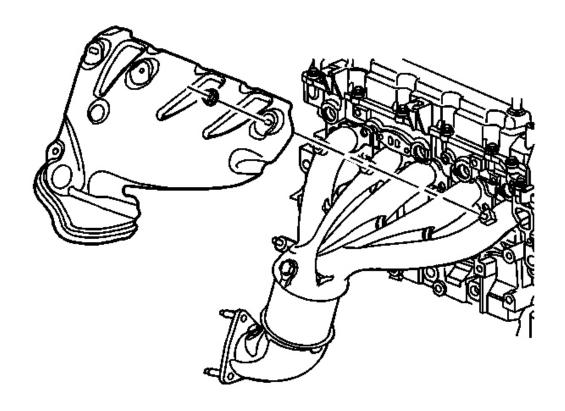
View Of Exhaust Manifold Heat Shield Courtesy of GENERAL MOTORS CORP.
